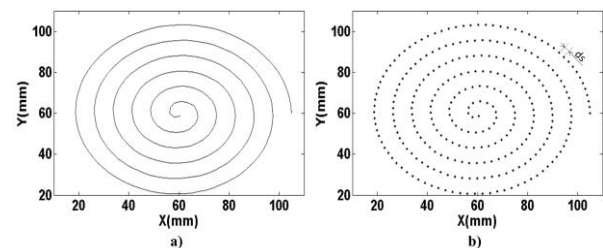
a) Spiral tool path, b) tool path discretized to small distances
